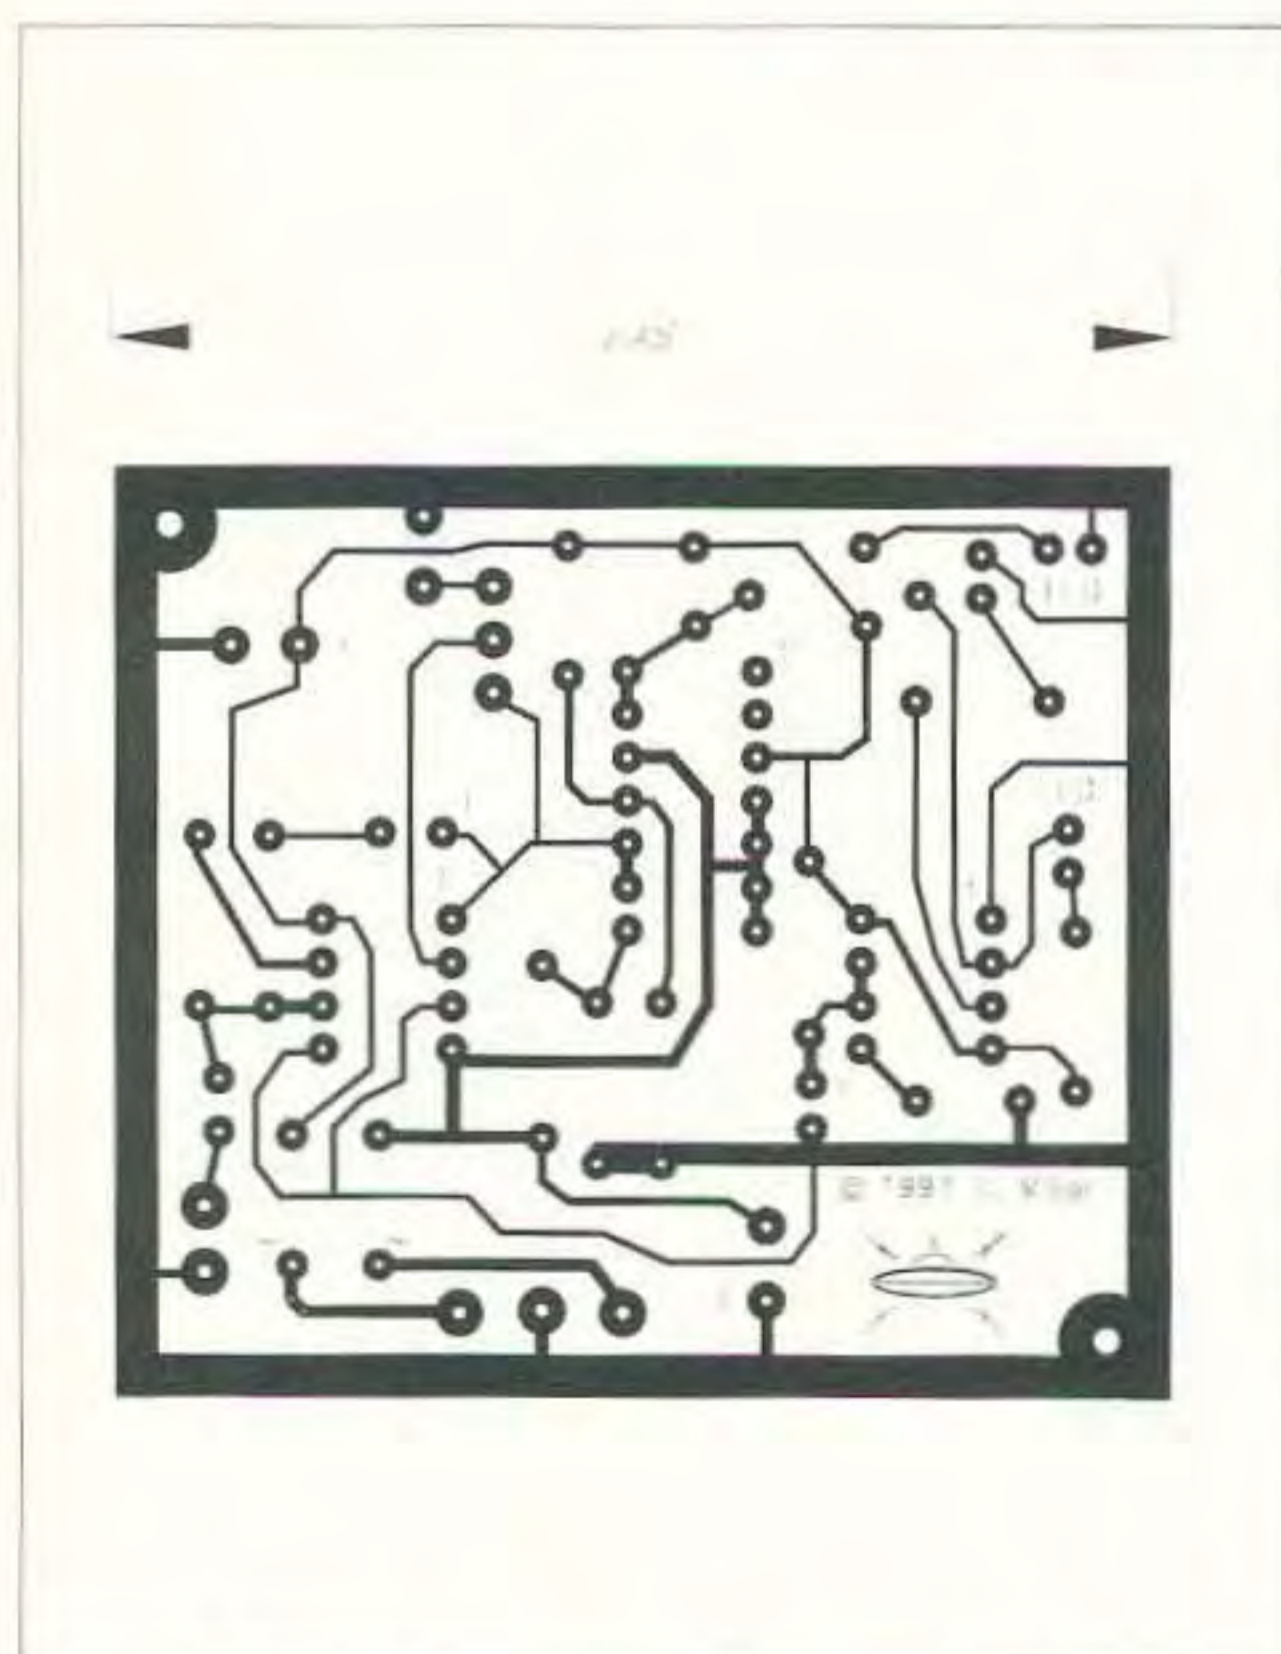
Printed circuit board pattern for the "UFO Detector" magnetometer.
